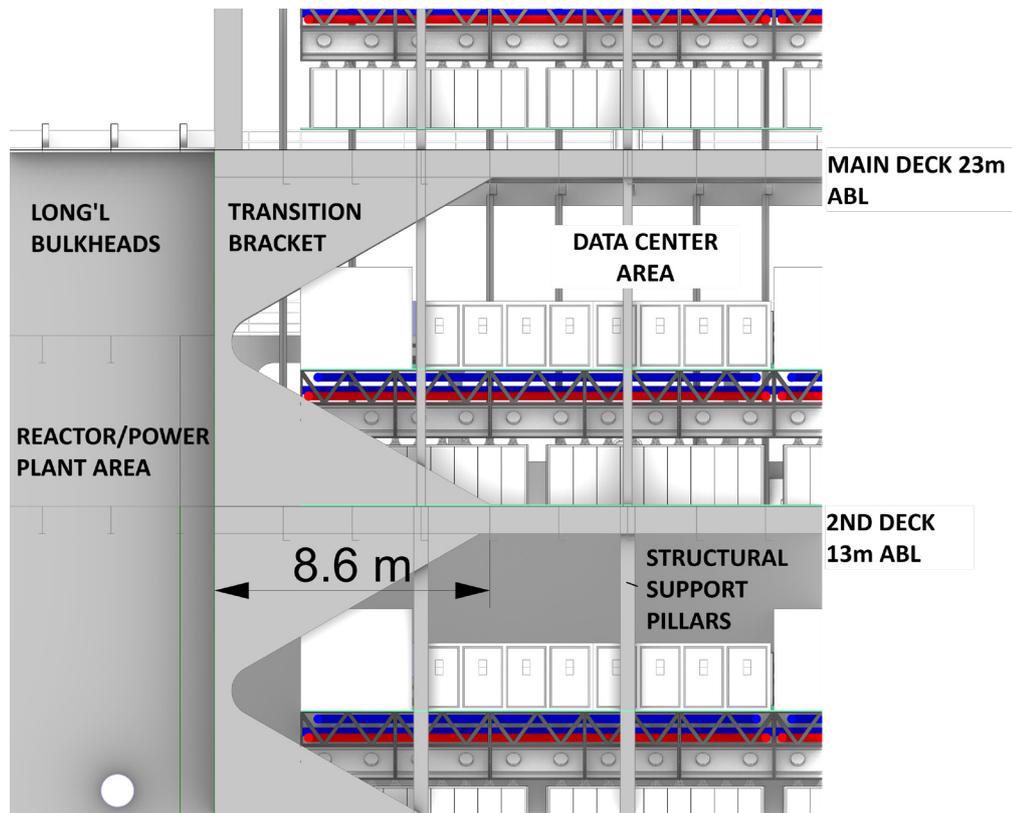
Longitudinal elevation at CL of transitional brackets between nuclear power plant and data center section.
